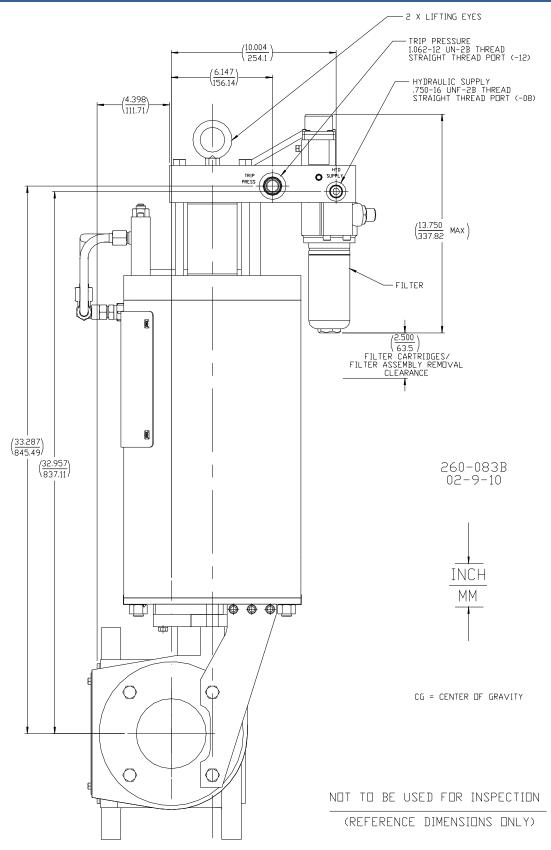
Gas Stop/Ratio Valve Outline Drawing (6-inch, SS-260)
